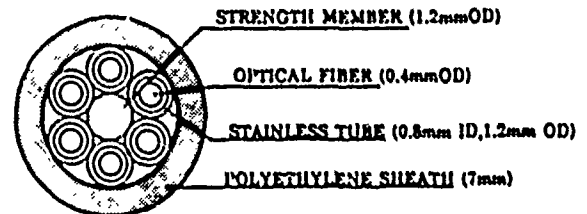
CROSS SECTION OF DEVELOPED CABLE
